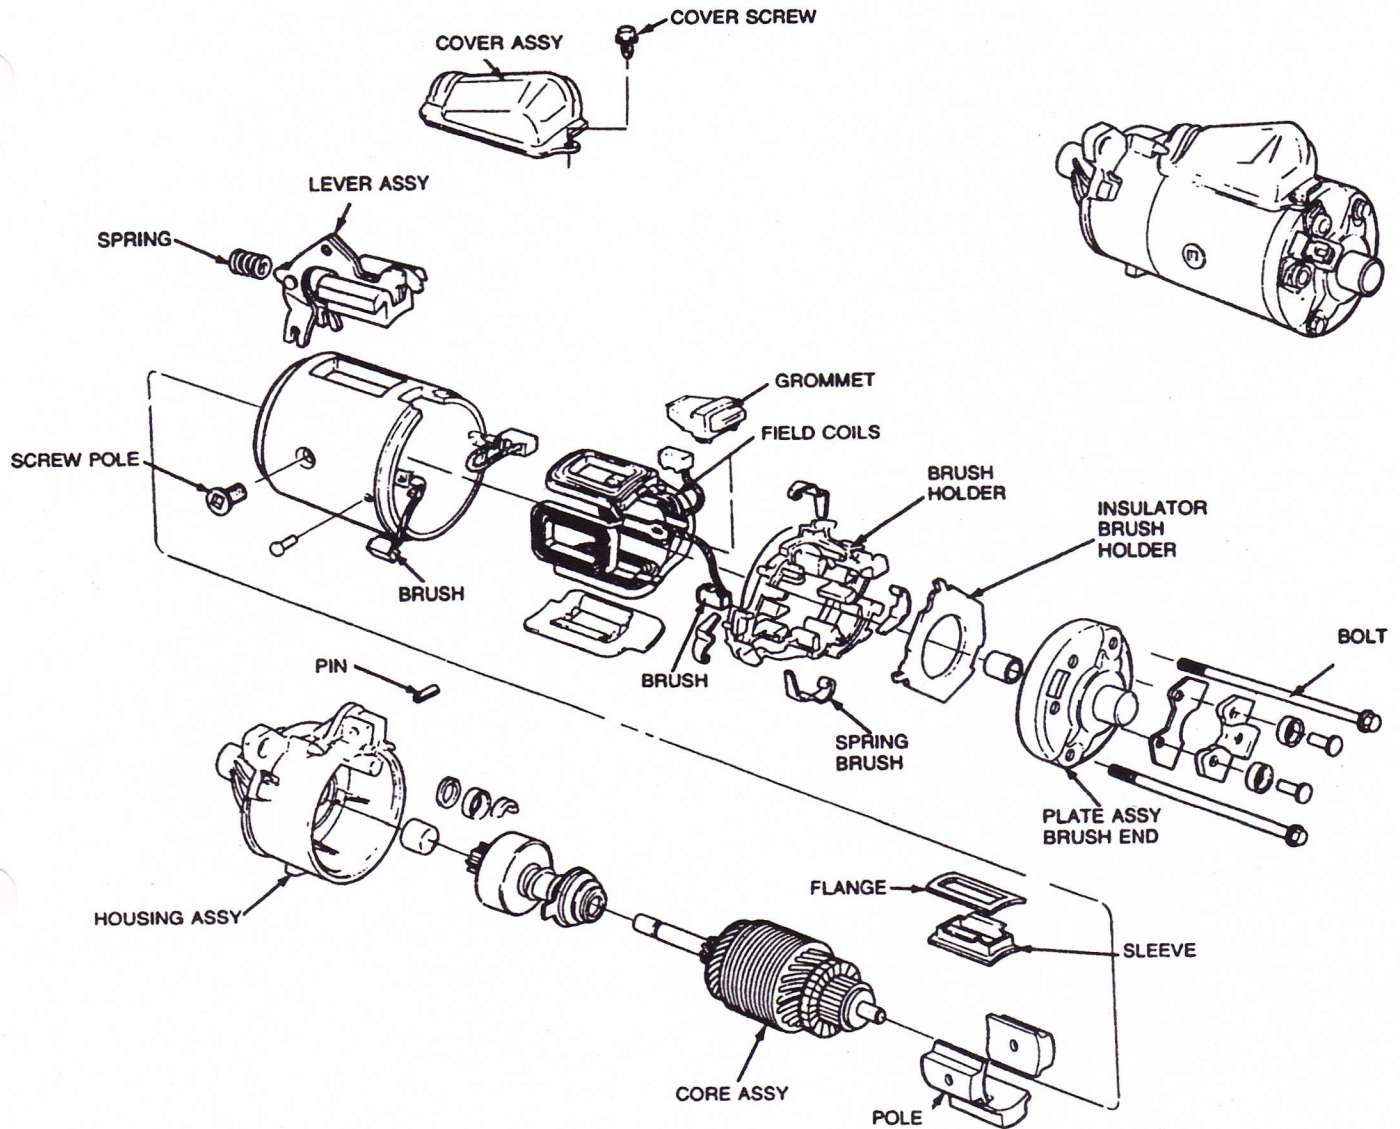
Typical positive engagement movable pole shoe starter. *Courtesy of Ford Motor Company
